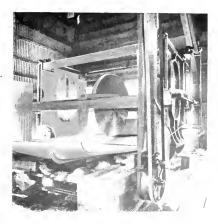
72-in. Diamond Saw Belt Driven by a 440-volt, 3-phase, 100-h p., 60-cycle, 154-r p.m. Induction Motor
